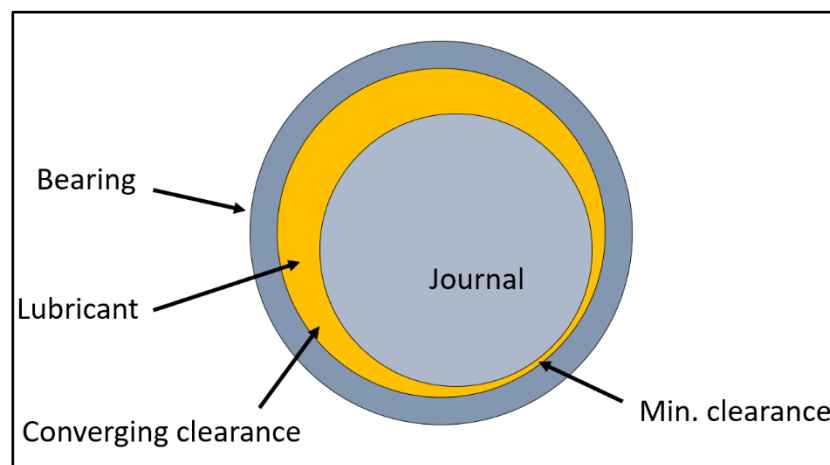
Sketch showing the cross-sectional view of a typical journal bearing.
